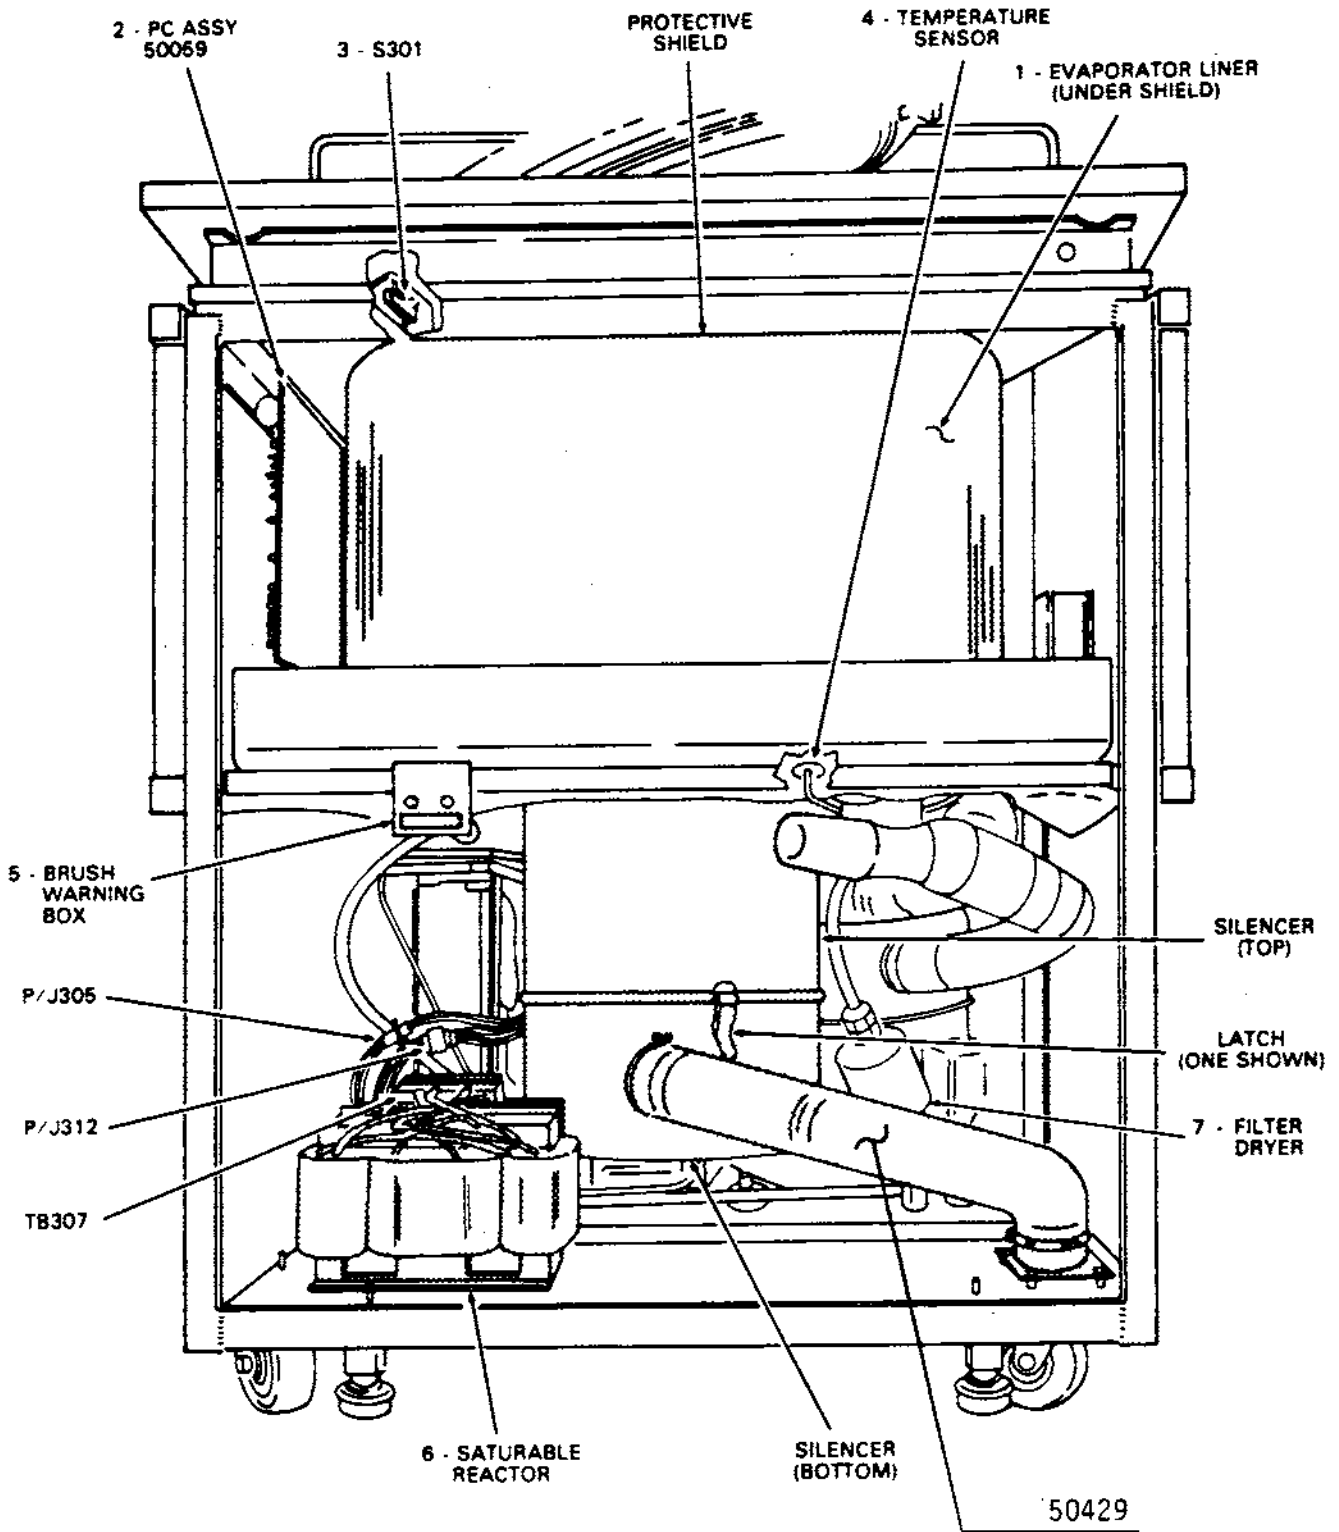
RC-5B Parts Location: Cabinet (Front View)
